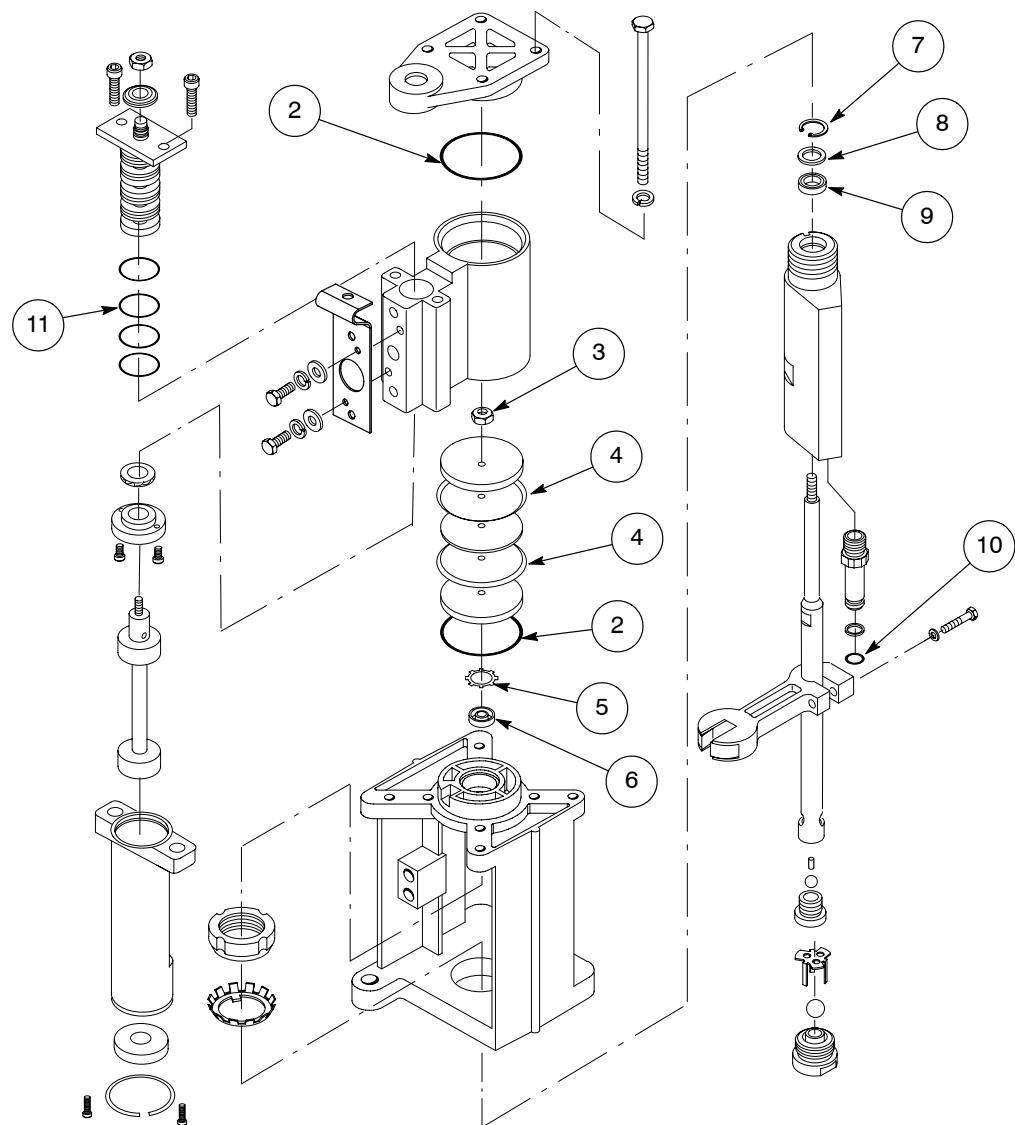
14:1 dual-acting pump UpTime Pack parts
